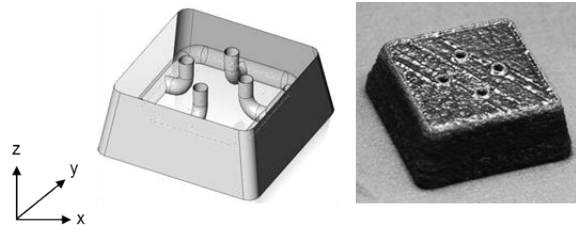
Laser melted indexable insert prototypes using WC-Co 88-12 with integrated cooling channels
